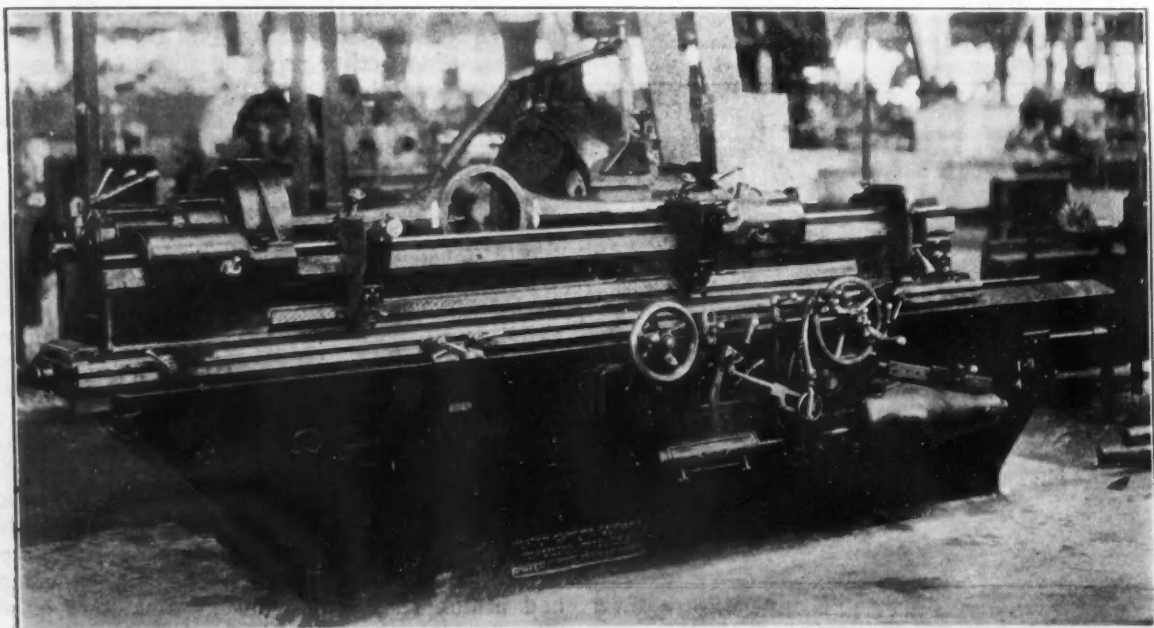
GRINDING A REAR-AXLE HOUSING HAVING A LONG STRAIGHT BEARING ON EACH END
